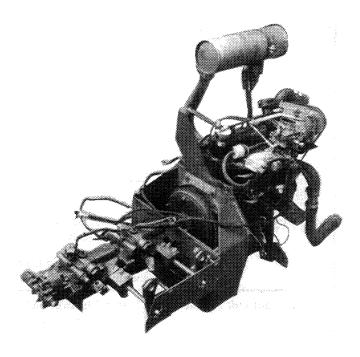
Gasoline Engine, Tandem Pumps & Gear Pump Removed from Loader
